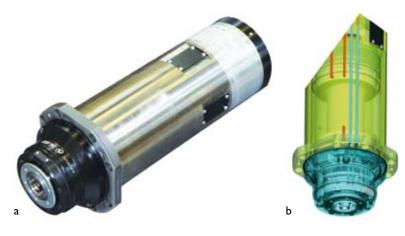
The StepTec tool spindle applied in Mikron HSM machines. (a) Overview.
